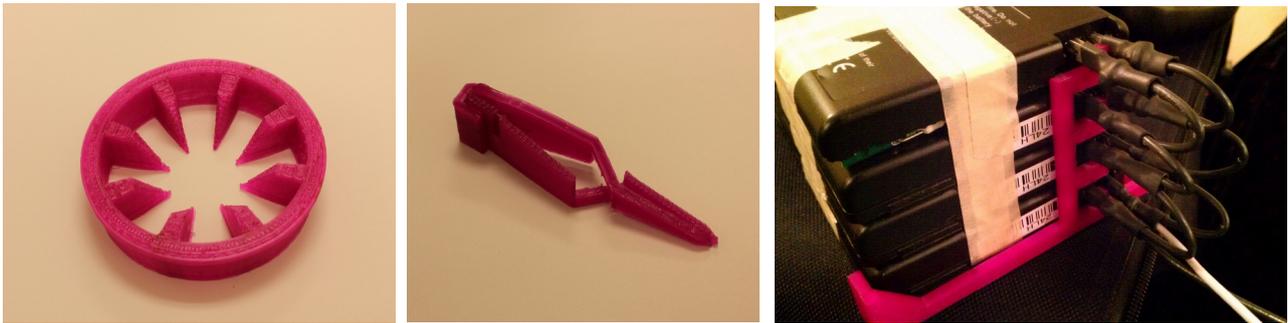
OSAT printed on the ultra-portable PV-powered open-source suitcase Foldarap 3-D printer a) avocado pit germination holder, b) cross tweezers and c) battery terminal separator.
